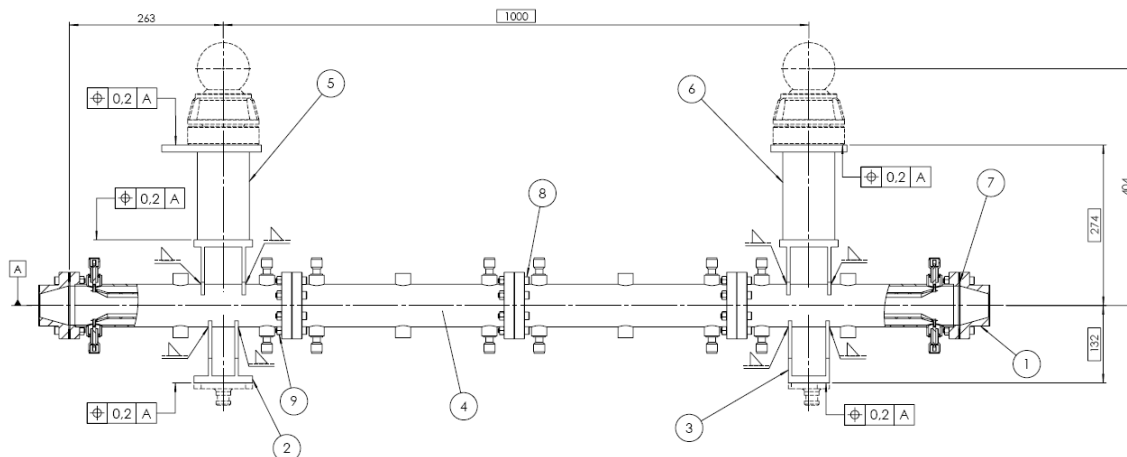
Tail Clipper drawing with supports and alignment devices
